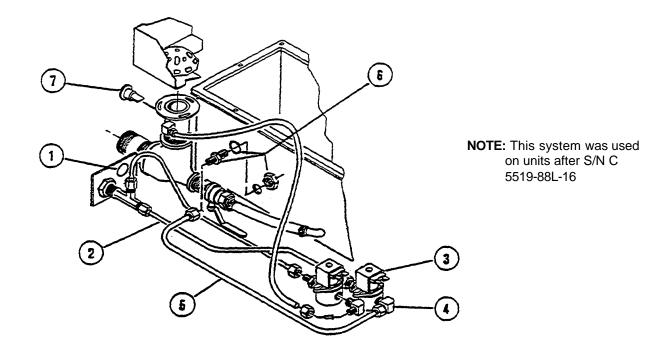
COLD WATER INLET TO STEAM GENERATOR
